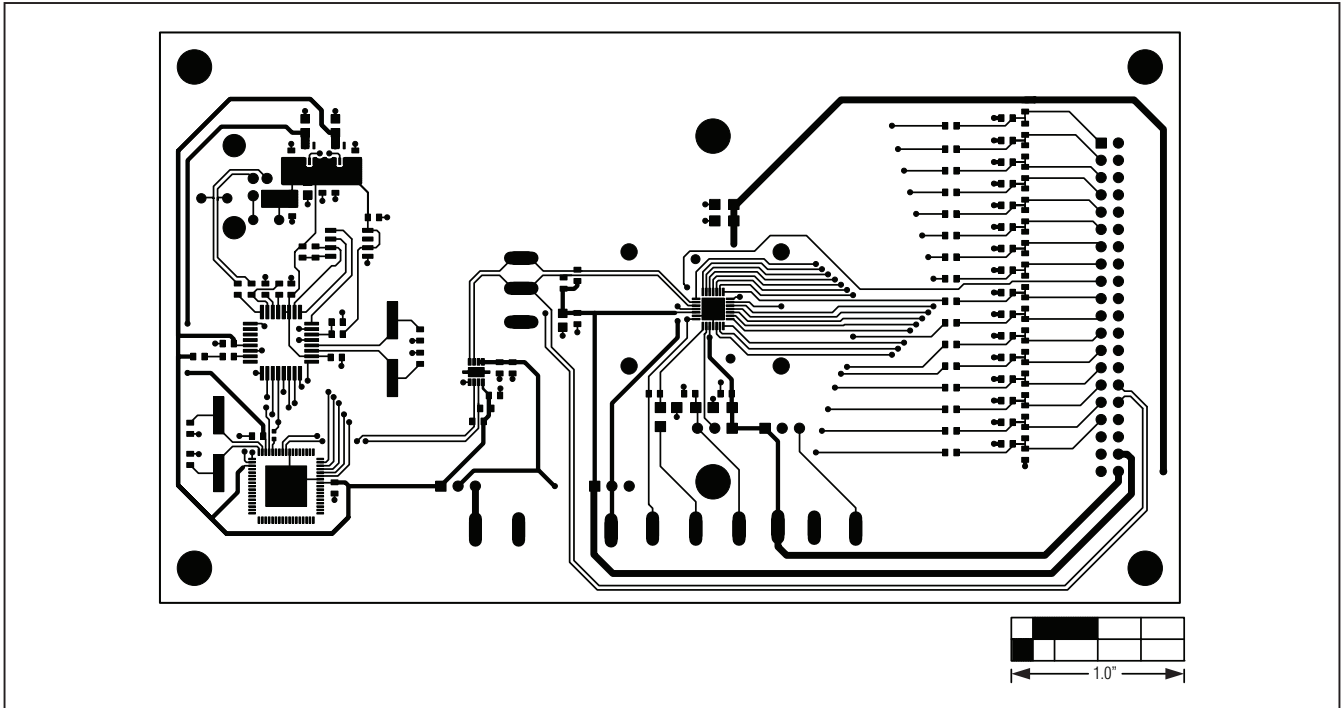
MAX9674 EV Kit PCB Layout—Component Side
